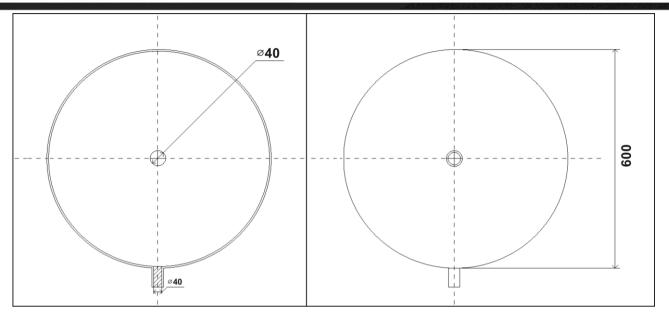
Sludge holding tank top view and bottom cross-sectional views respectively.
